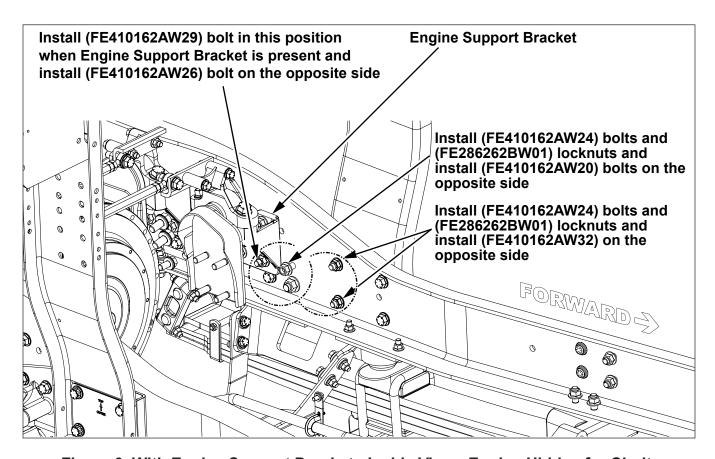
, With Engine Support Bracket - Inside View - Engine Hidden for Clarity
